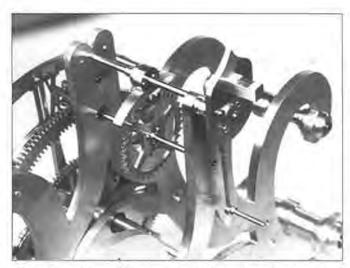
A view of the escapement. Note how the ring wheel drives the escape arbor pinion.
